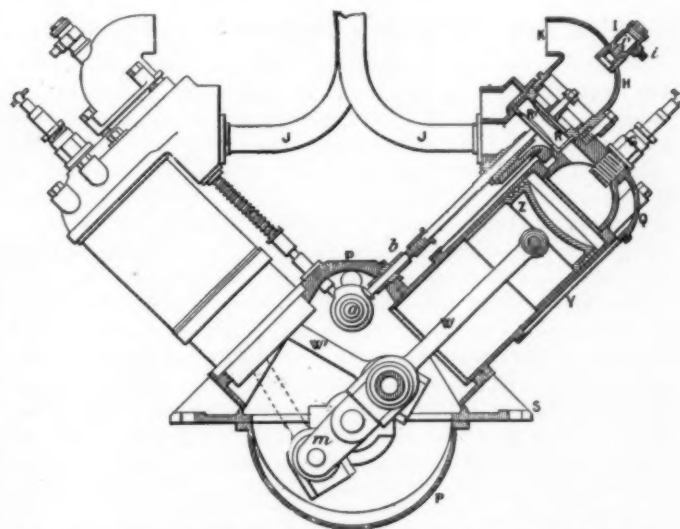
Section of Antoinette Eight-Cylinder Aeronautical Engine, Z Piston; R Automatic Inlet Valve; R1 Mechanical Exhaust Valve; K Air Inlet; J Exhaust Manifold; A Camshaft; Y Copper Water Jacket.
